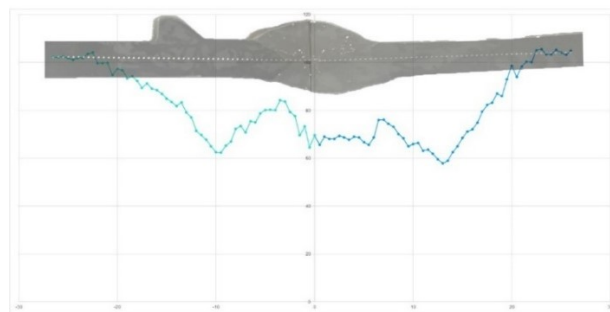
Hardness profiles for the GMA weldment, including a macro image of the hardness specimen.
